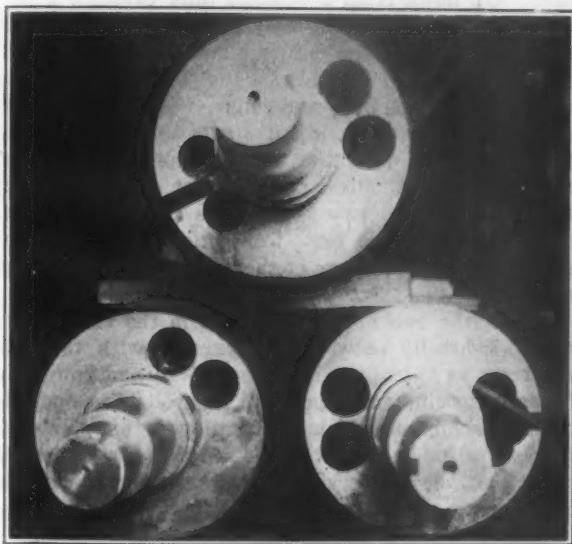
(Above) Rolls of 0.40 Carbon Steel Are Drilled To Depth of 45 In. The lower right hand roll shows one side finished, two holes having been drilled, a slot planed, and the remaining material between holes removed with an end mill
